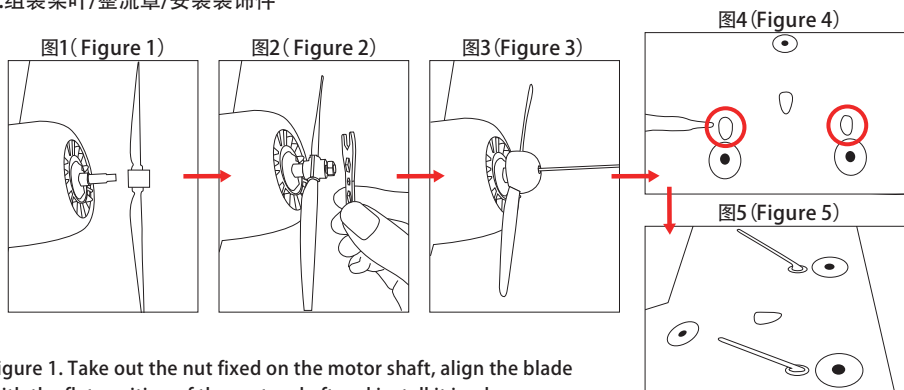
Take out the nut fixed on the motor shaft, align the blade with the flat position of the motor shaft and install it in place.
